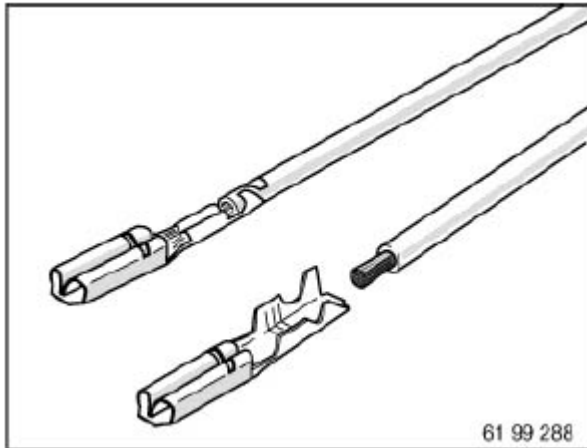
Identifying Crimp Contact Sleeves On Both Wire Ends
